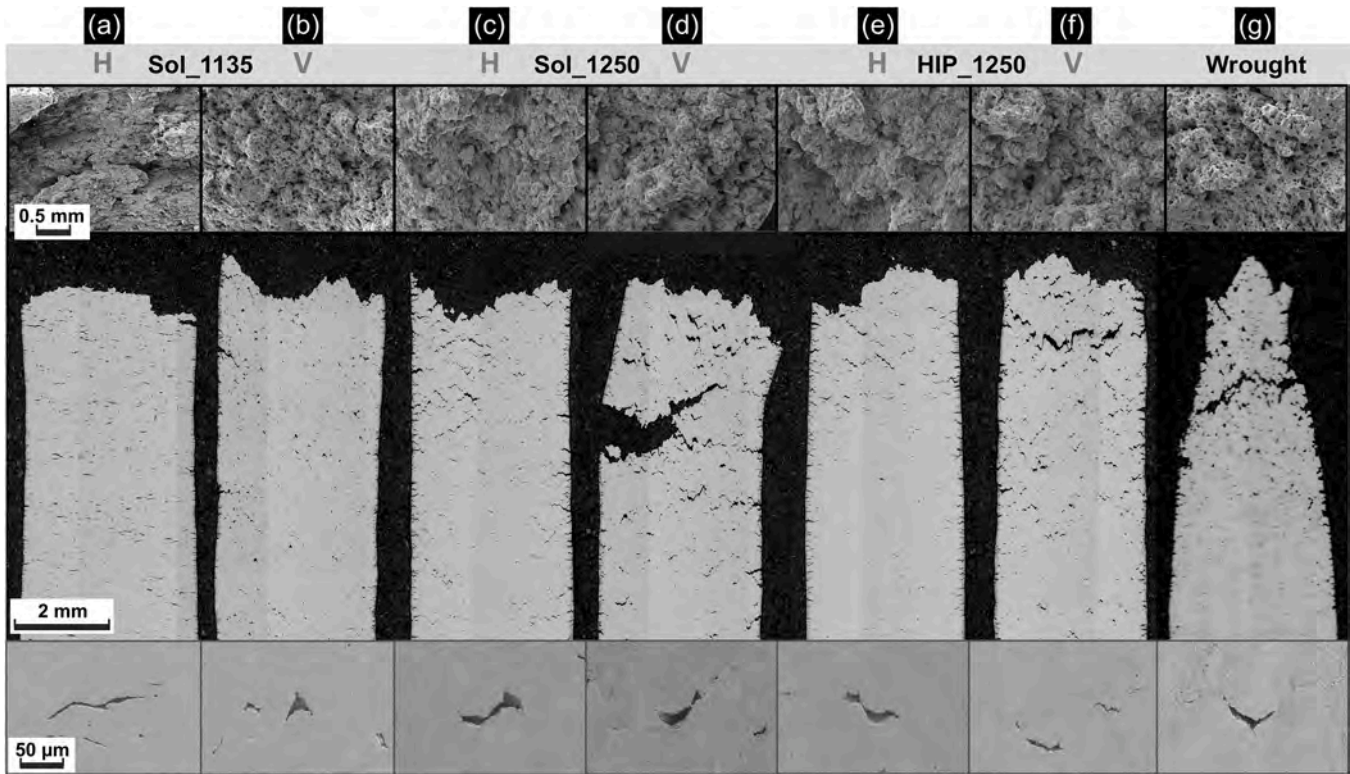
Fracture surface and cross-sections of creep tested specimens of (a)-(b) Sol_1135; (c)-(d) Sol_1250; (e)-(f) HIP_1250; (g) Wrought.
